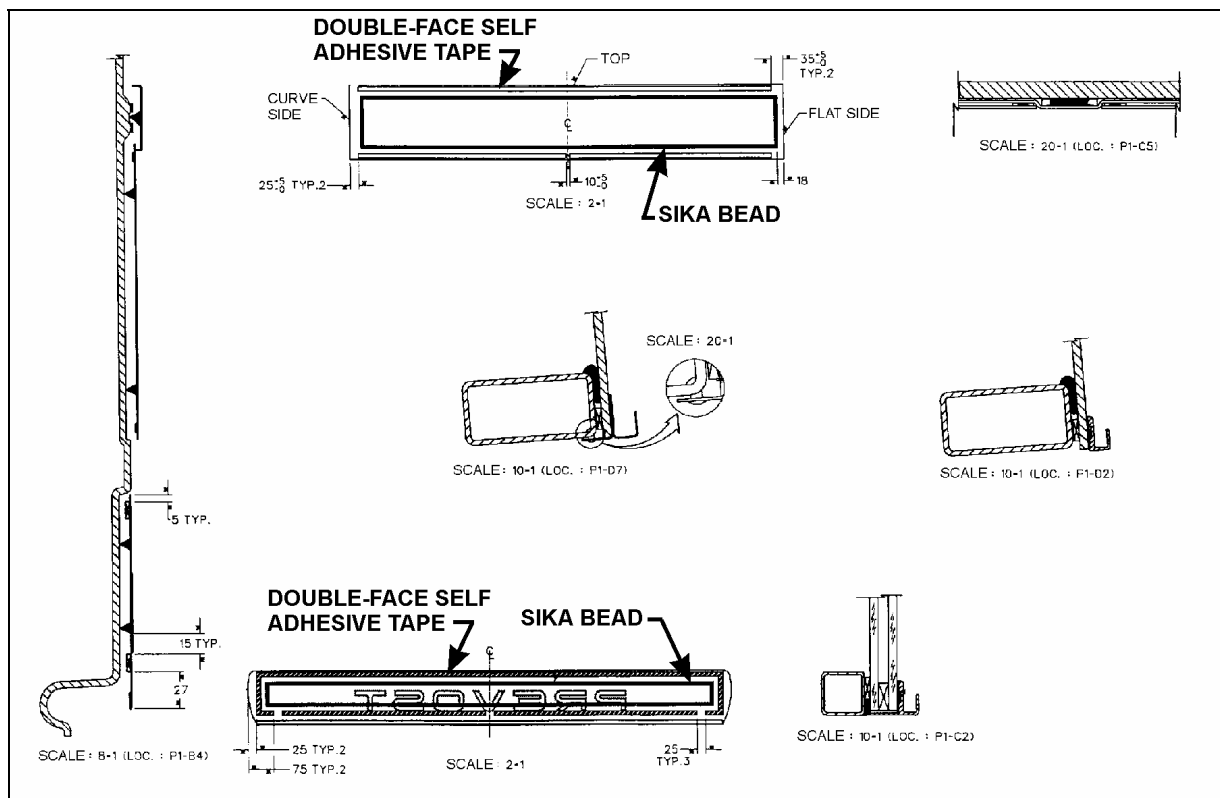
FRONT FACE BODY PANELS INSTALLATION
